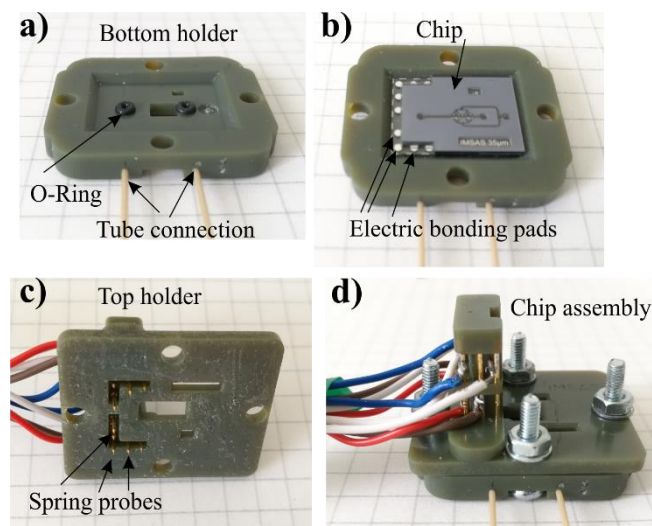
A microfluidic chip holder ($\sim 3 \times 2.5 \text{ cm}^2$) including fluidic and electric connections. a) The bottom holder part contains donut shaped recesses where O-rings connecting the chip to the channel structure within the printed holder, fits. b) A chip fitted in the bottom holder. c) The top holder including spring probes to connect the bonding pads of the chip. d) A photo of the assembled chip and holder.
